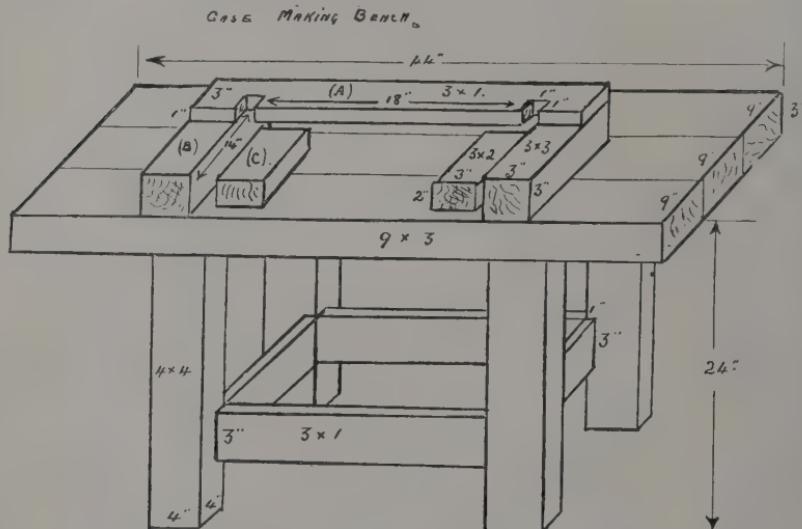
(Fig. 3).—CASEMAKING BENCH FOR MAKING AUSTRALIAN DUMP, CANADIAN STANDARD, BUSHEL AND HALF-BUSHEL CASES, AND OTHER FRUIT CASES, 18 INCHES IN LENGTH, INSIDE DIMENSIONS.
